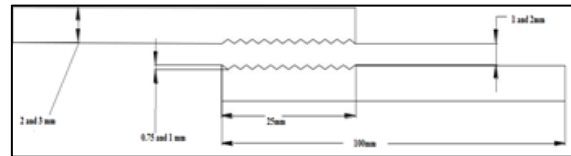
Joint Geometry (All Dimensions Are In Mm)
